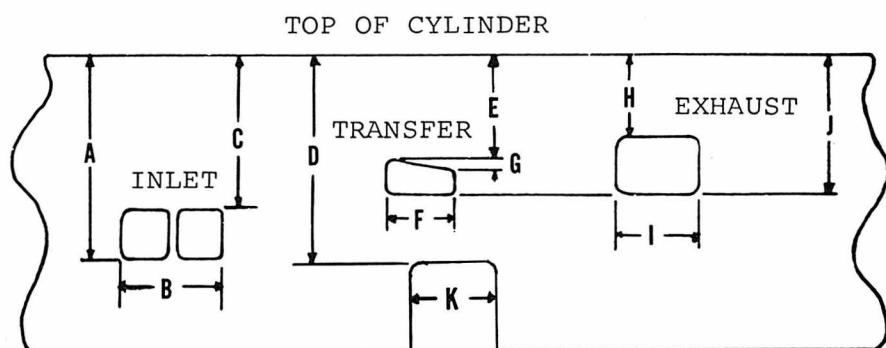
Diagram of cylinder porting used on YL-1 Yamaha. Refer to text for dimensions.
